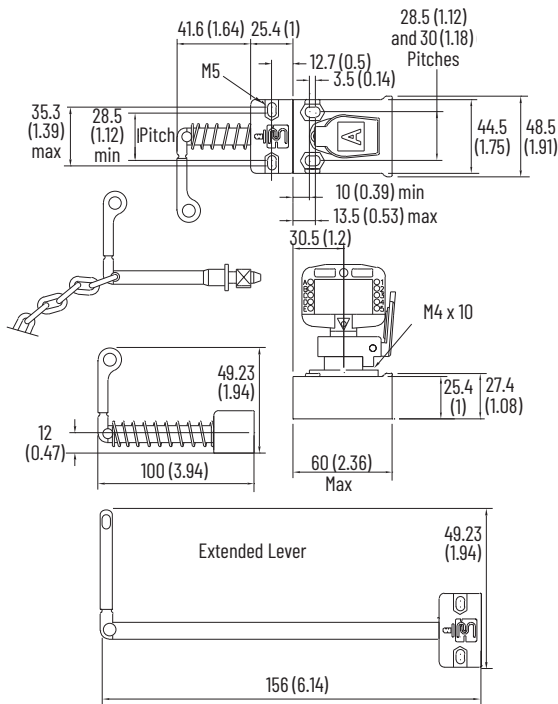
Mechanical, Five Way, Lever Actuator [mm (in.)]
